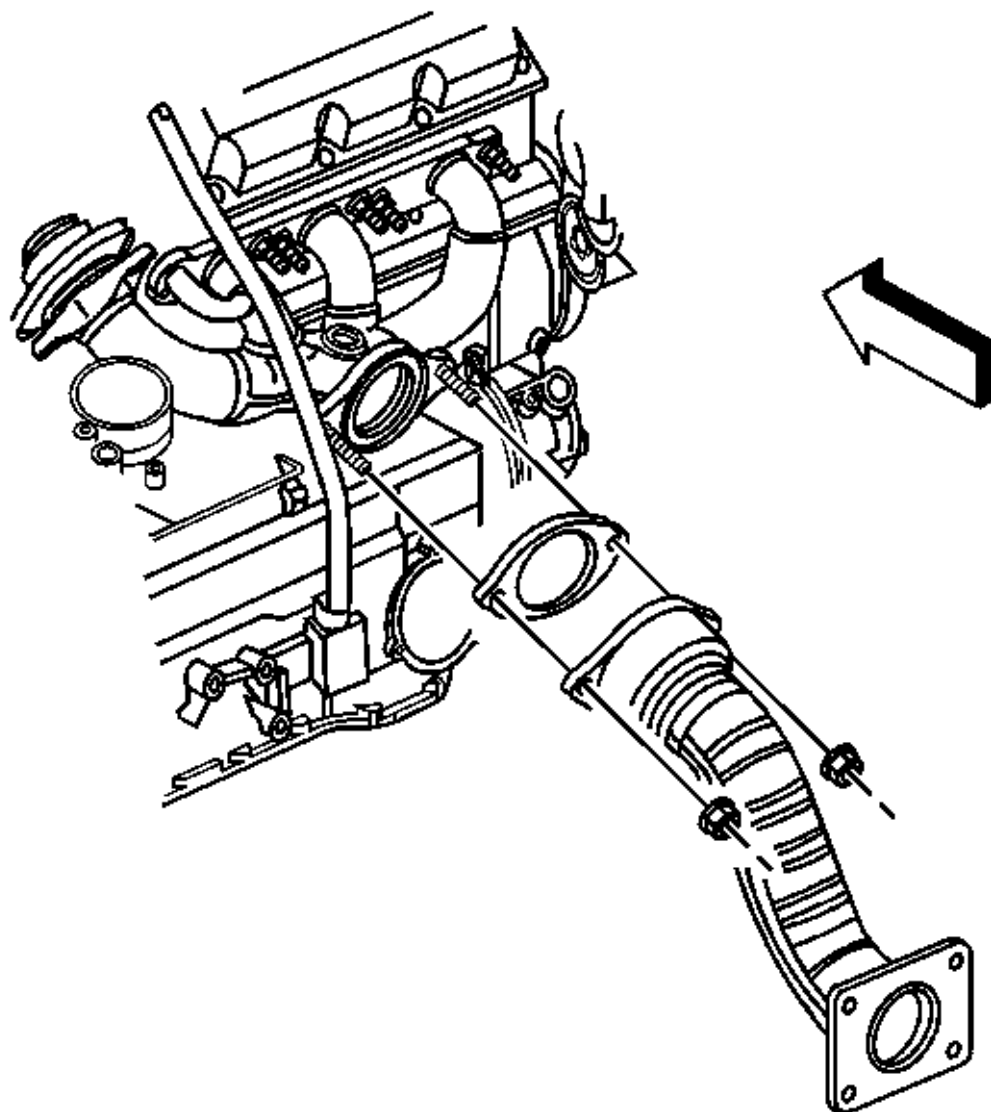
View of Exhaust Manifold Pipe, Studs, & Bolts
